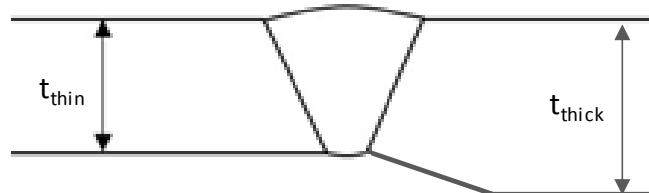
Transition girth weld (back-beveled design)
